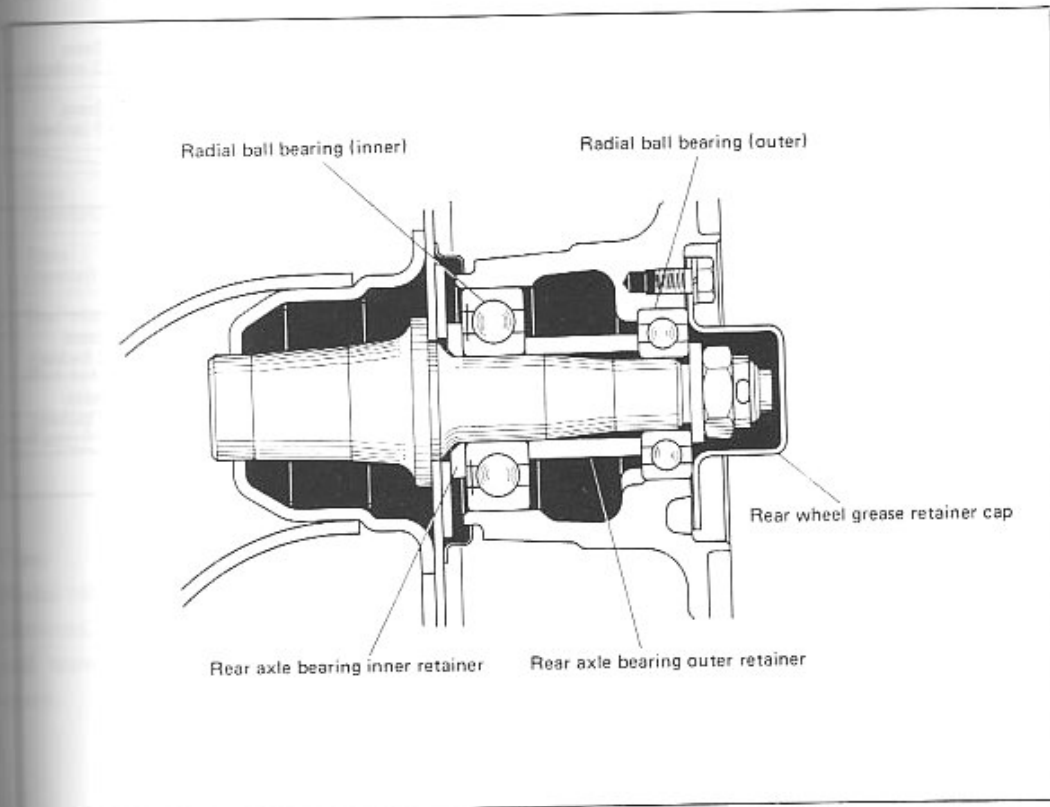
Sectional View of Rear Axle Bearing Related Parts
